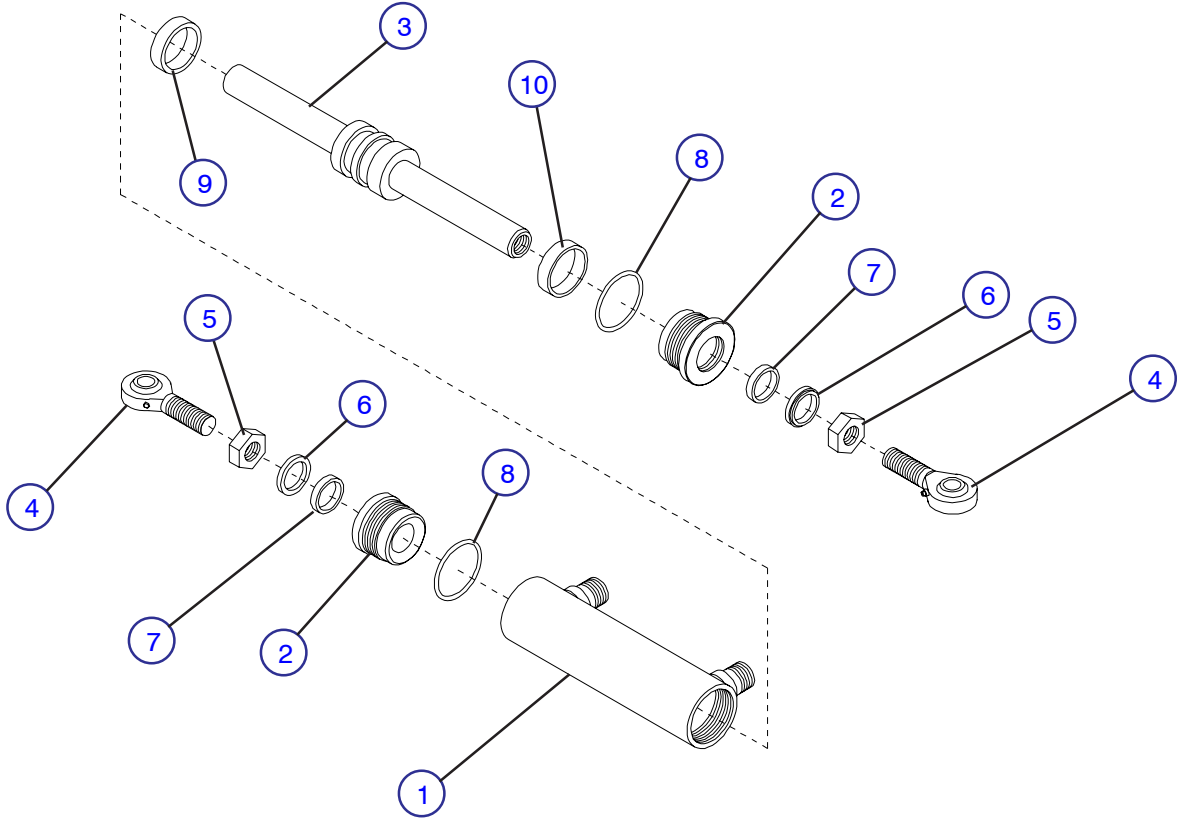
A. STEER CYLINDER ASSEMBLY
